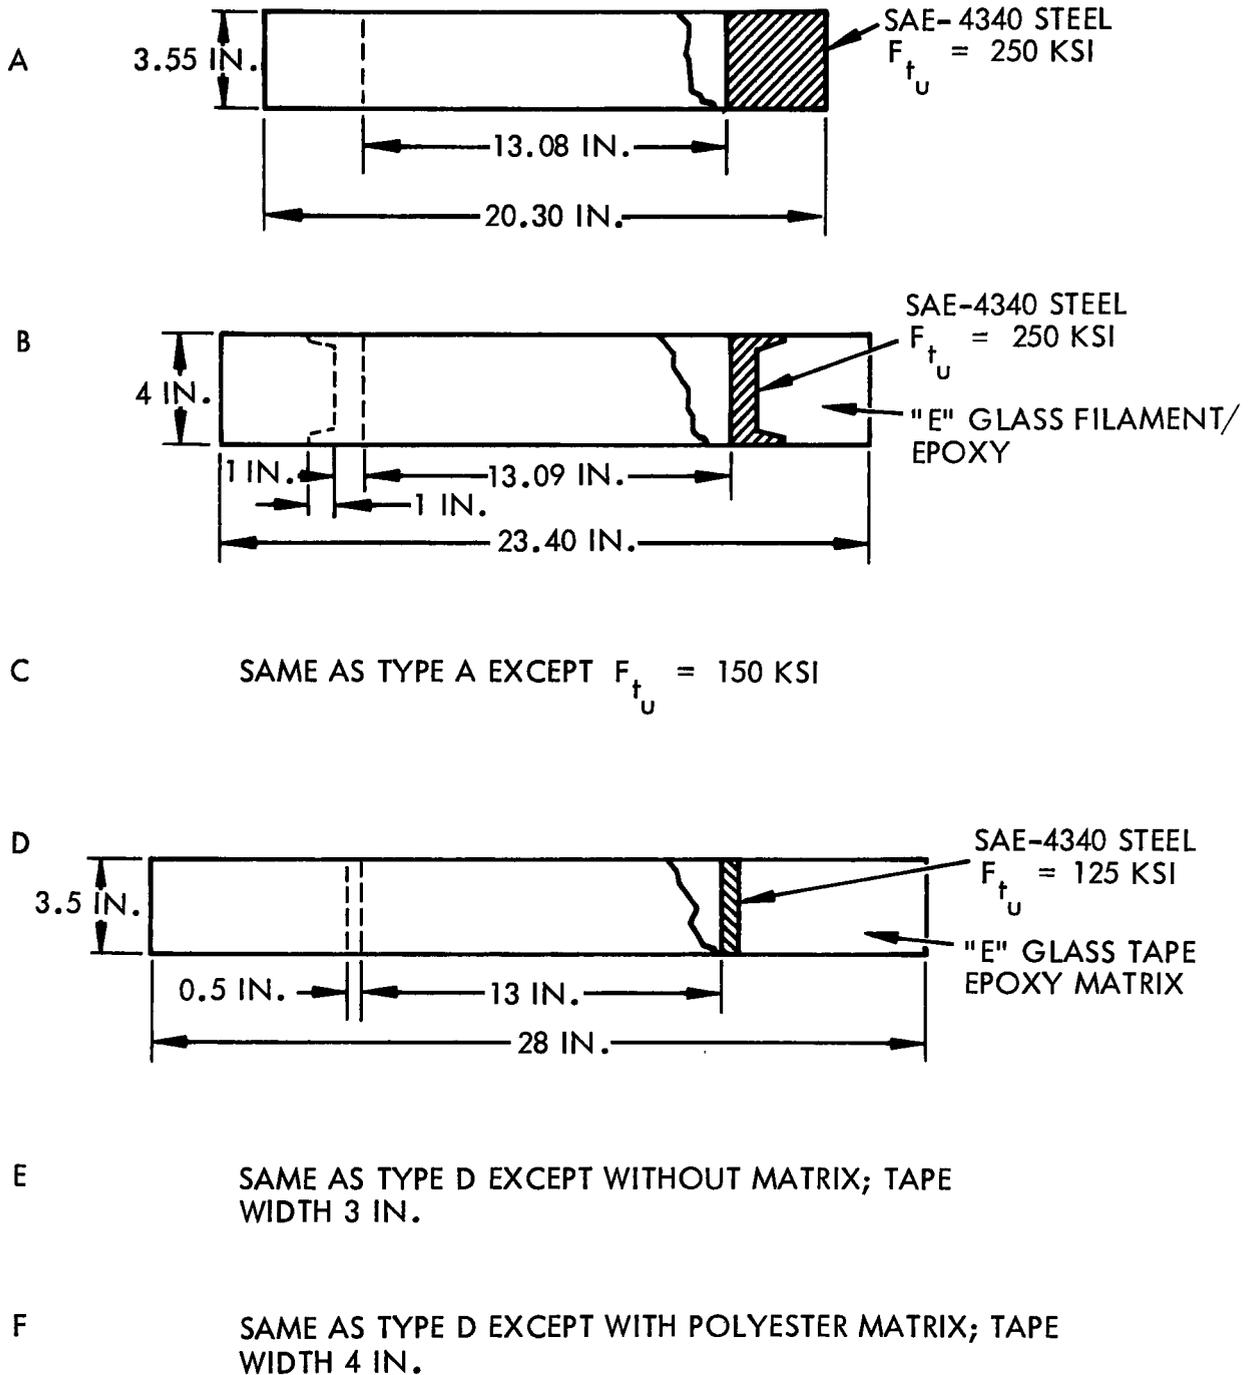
Types of Containment Ring Used in Flywheel Containment Tests
